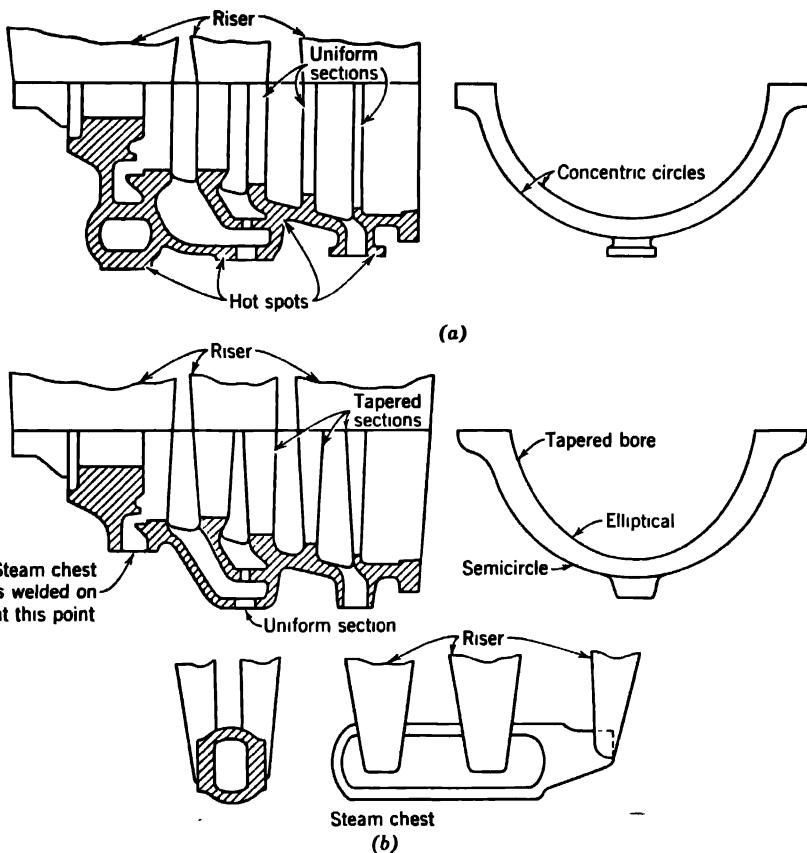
(a) Original design of casting. (b) Casting after redesign. Note use of tapered cross section to control directional solidification. Extra padding could be removed by machining if uniform wall were required.
